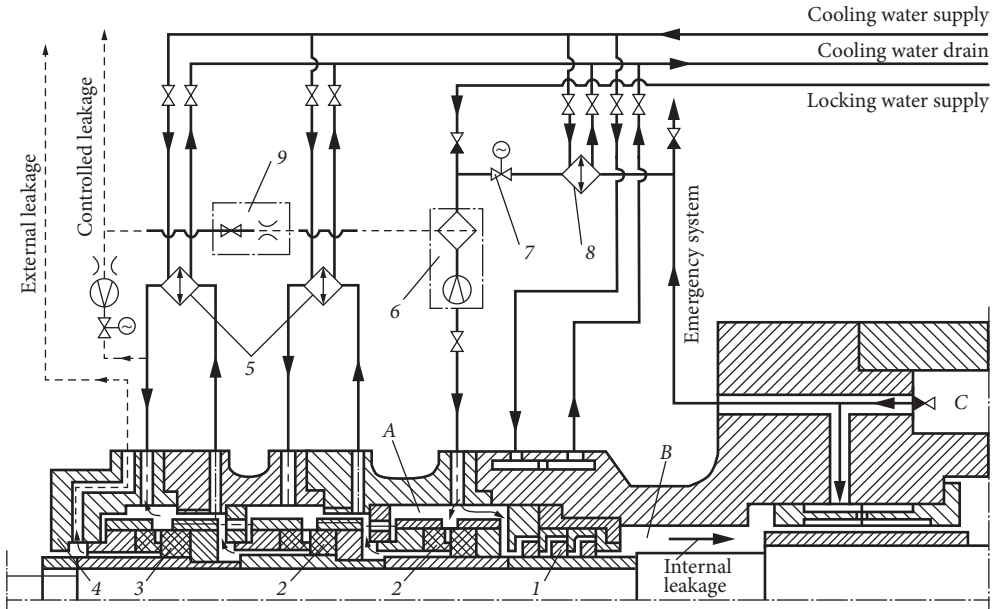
Two-Stage Impulse Seal: 1 — gap seal; 2, 4 — the first and second stages of the impulse mechanical seal; 3 — labyrinth seal; 5 — organized leakage line; 6, 7 — refrigerators; 8 — buffer water supply line; 9 — leakage line; 10 — cooling water inlet and outlet lines
